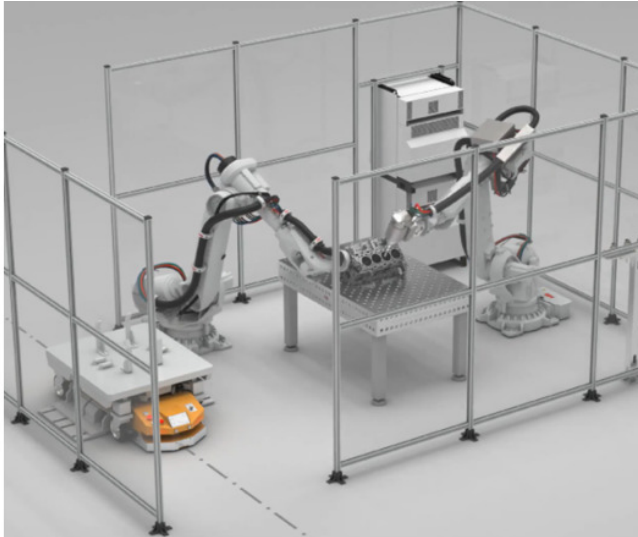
Spindle Packages for Machining Applications. Source: ABB Robotics, <https://one.robotics.abb.com/en/solutions/p/Spindle-Packages>, last access 06/09/2025
